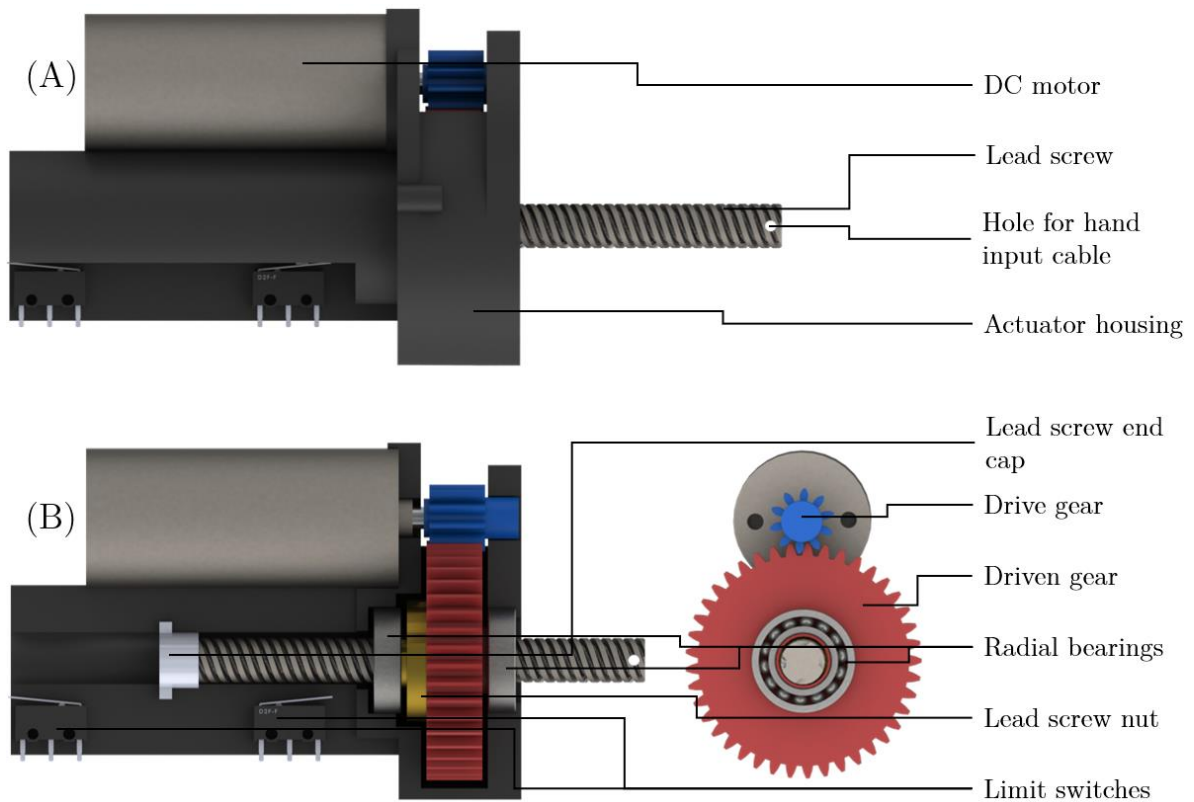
(A) The linear actuator. (B) The linear actuator is shown with the housing cross-sectioned next to a side view of the actuator without the housing.
